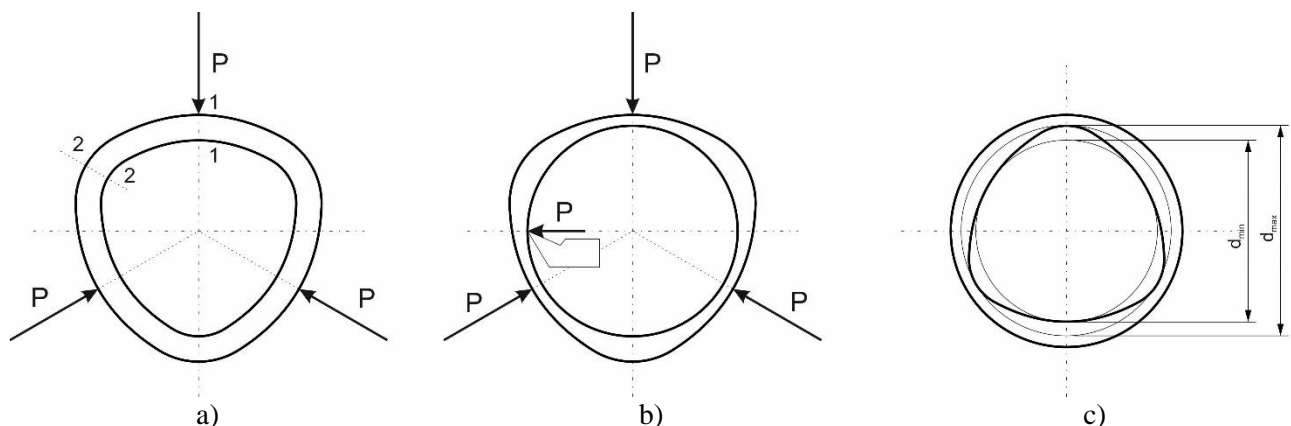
Elastic deformations when fixing in the mandrel with three jaws and machining by turning the inner surface, [2]: a) elastic deformations of the bush after fixing; b) the shape of the surface after processing; c) form error due to fixing; 1- bushing, 2-lathe cutting tool, [3]
